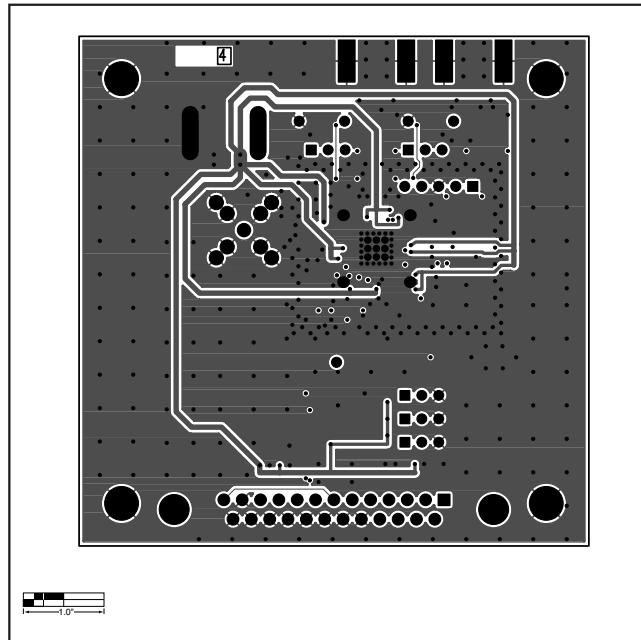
MAX355/MAX357 EV Kit PC Board Layout—Secondary Component Side
